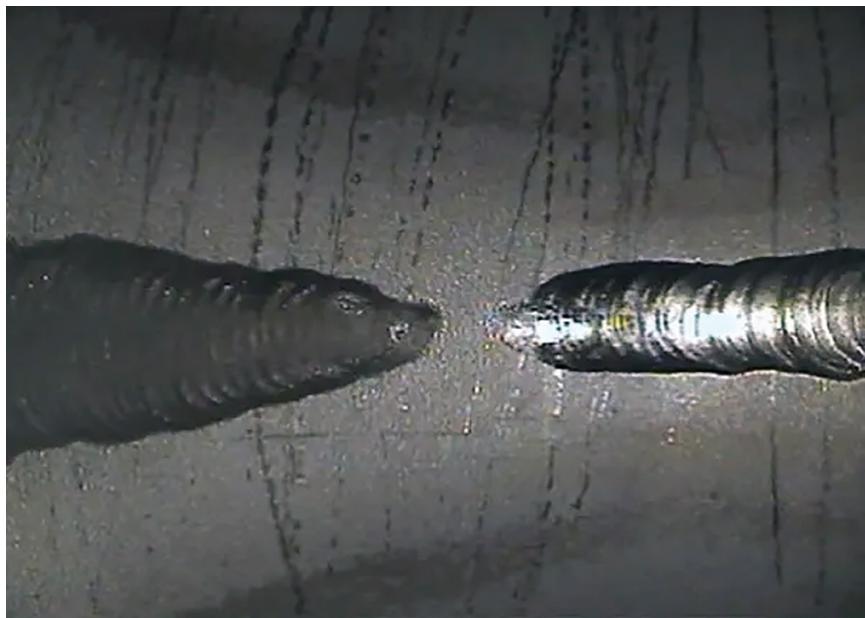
Videoscope inspection of a weld in stainless steel pipe showing incomplete joint penetration.
